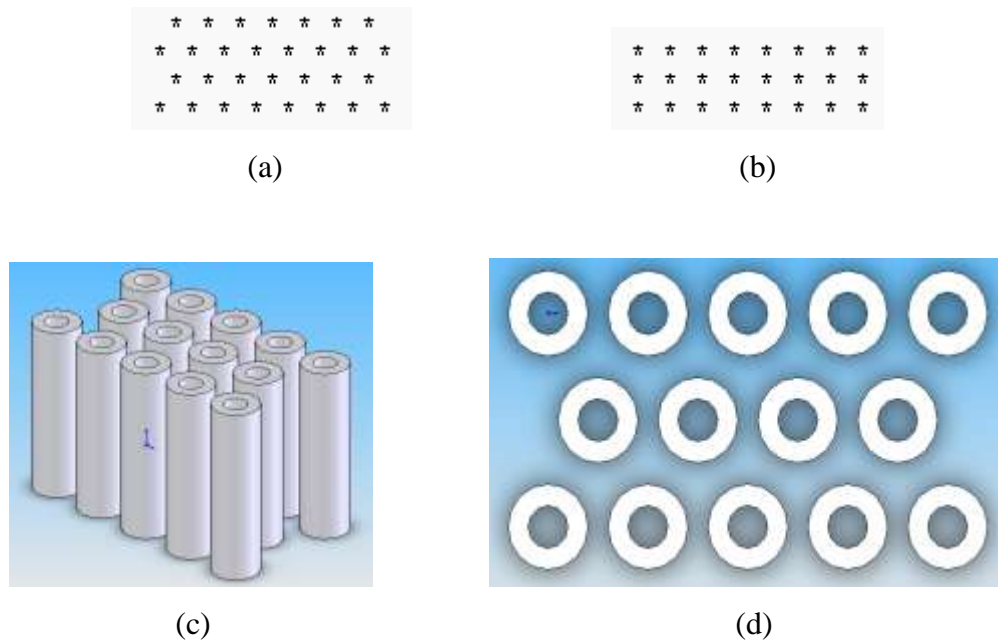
Shows the points that are arranged in staggered (a) and inline (a) while (c) and (d) shows the isometric view and top view of a staggered tube
